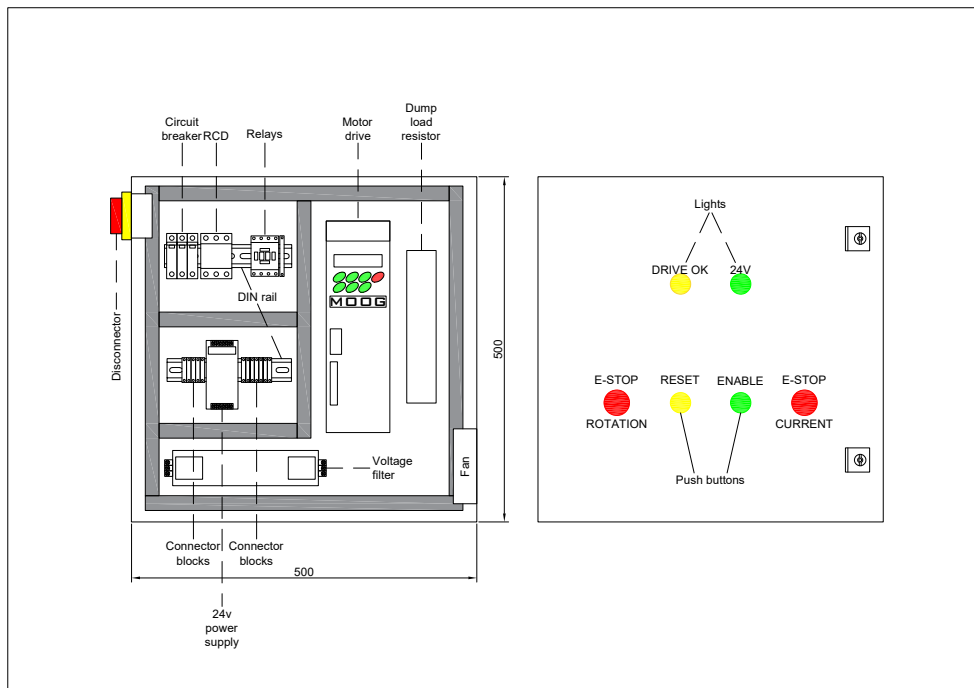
Motor control cabinet designed, built and commissioned by the author. All dimension in mm.
